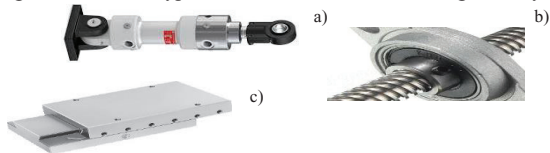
Driving mechanisms, a) hydraulic, b) bearing, c) sliding joint.
